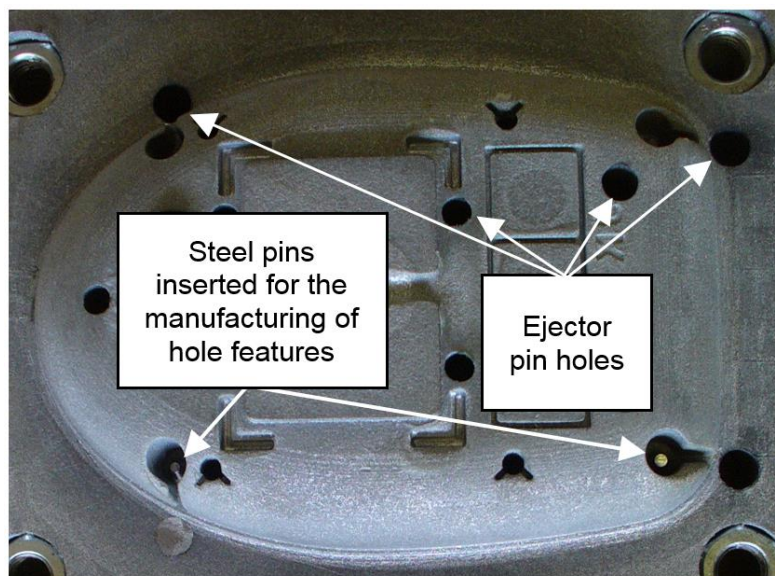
Machined and polished enclosure insert with ejector pin holes and steel pins inserted for the manufacturing of hole features.
